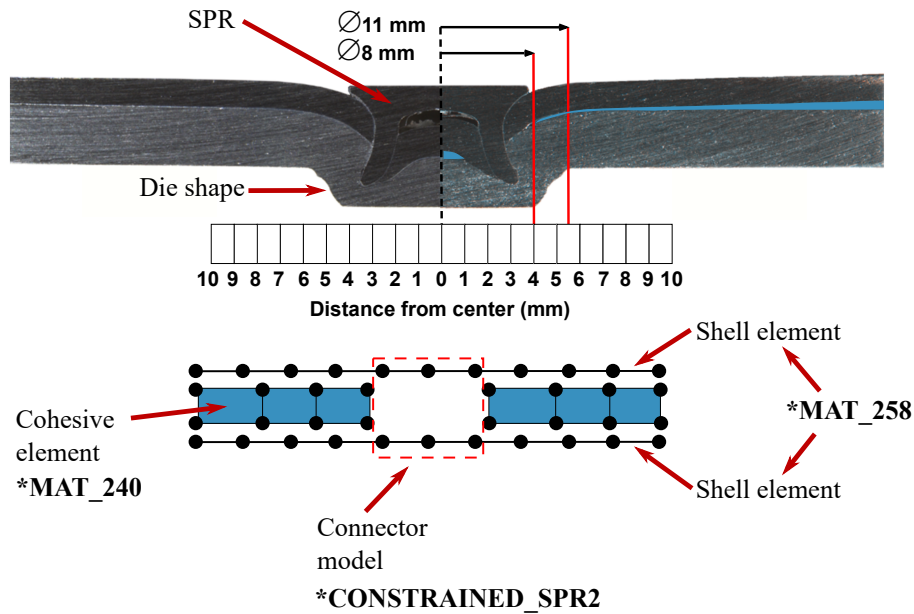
Cross section of hybrid joint with adhesive bonding and a self-piercing rivet (SPR) showing key dimensions. The corresponding schematic of the macro-scale numerical implementation is shown in the bottom part of the figure [126].
